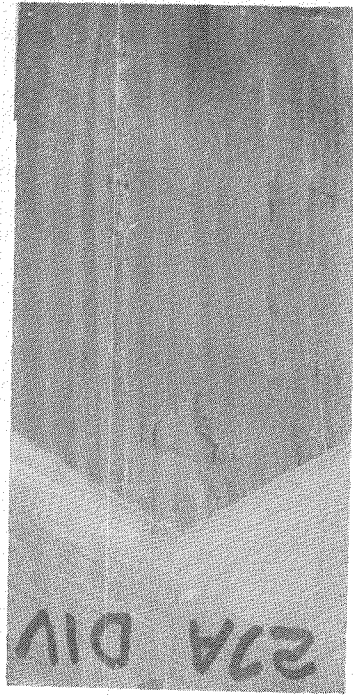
Fatigue crack surface not marked with Zyglo in divider geometry.
